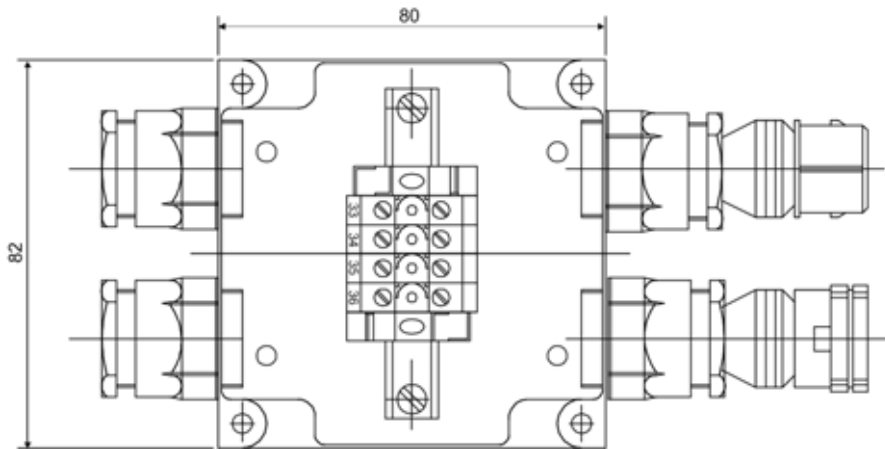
PCB dimensions: Hight 55 mm, Protection class: IP66
